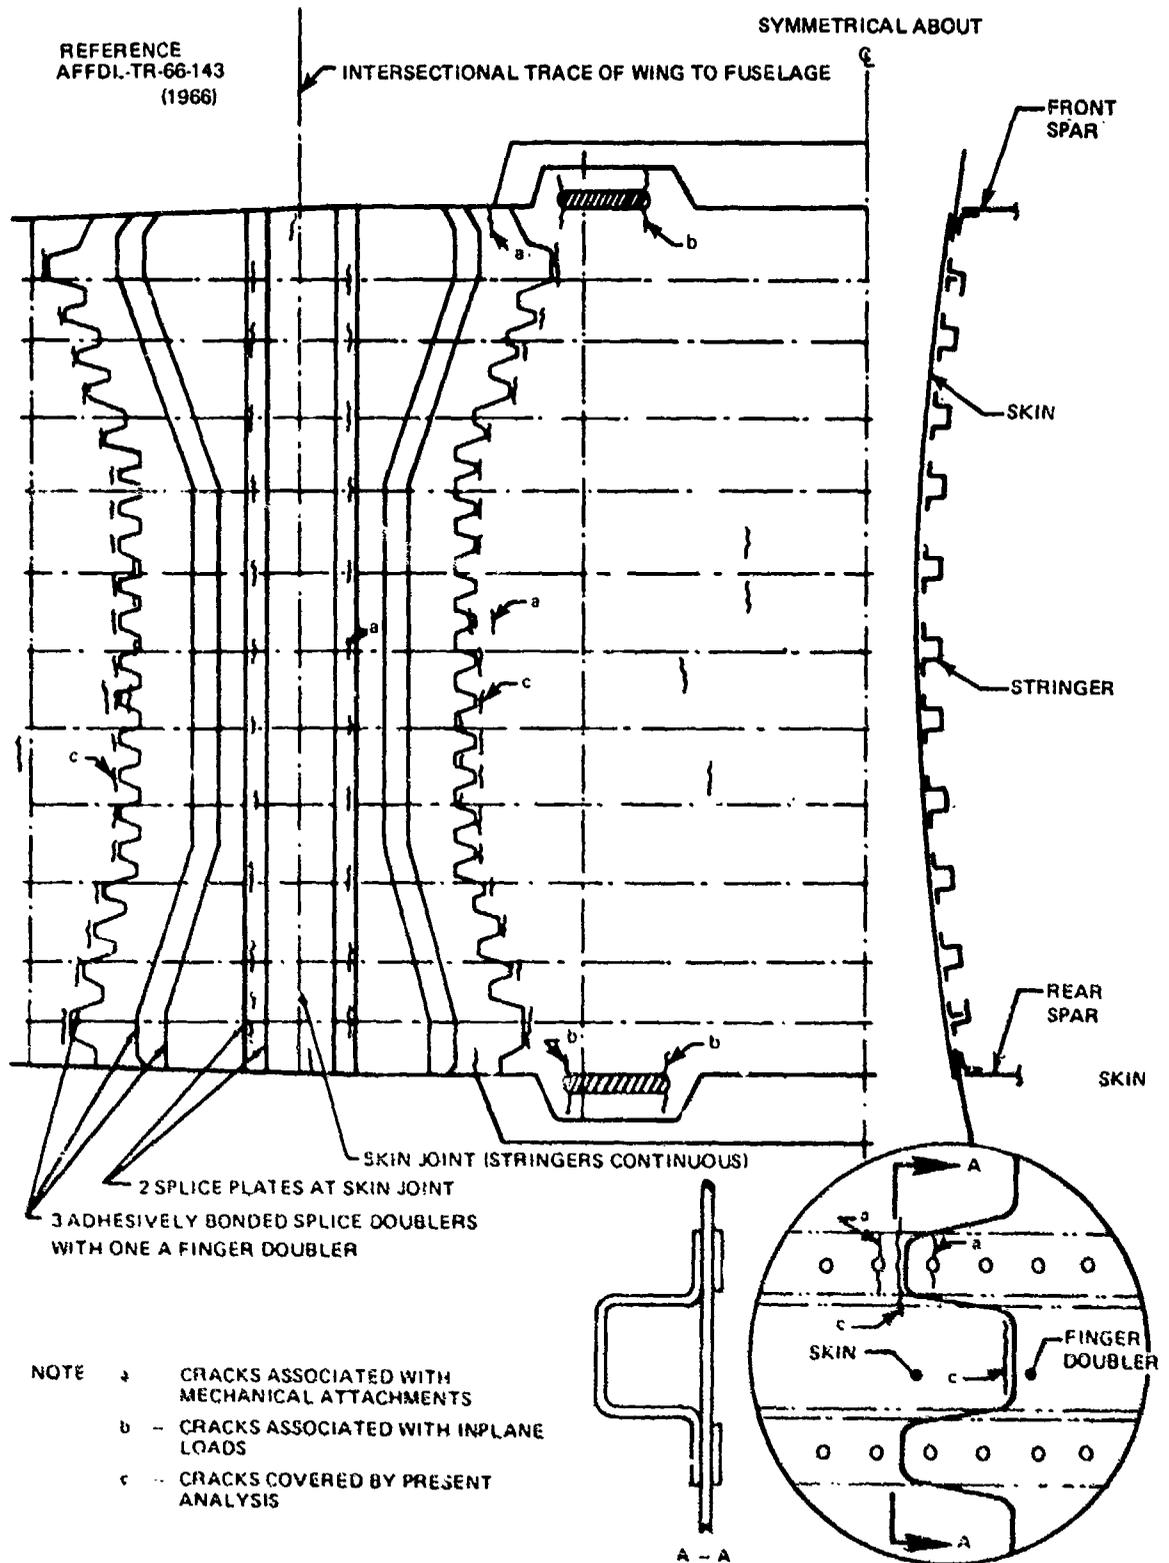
FATIGUE CRACKS DEVELOPED DURING TESTING OF AIRCRAFT STIFFENED WING PANELS WITH BONDED DOUBLERS
